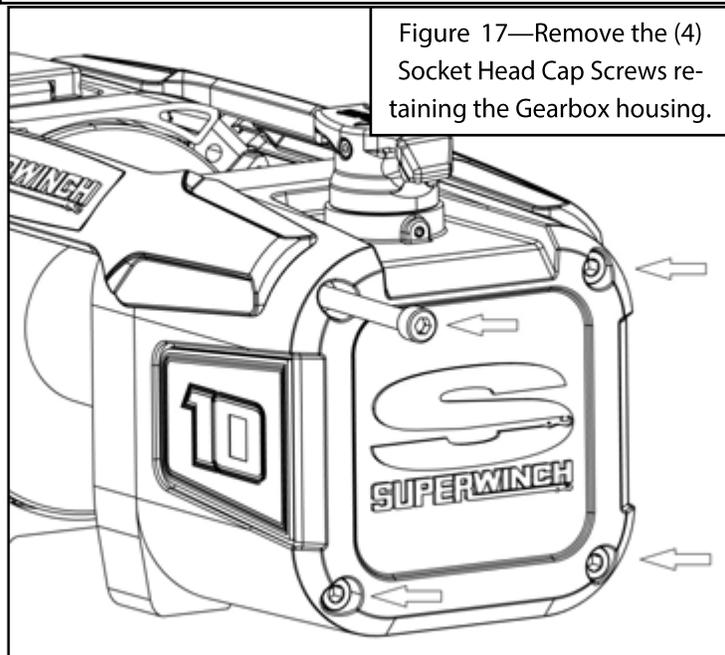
Remove the (4) Socket Head Cap Screws retaining the Gearbox housing.
